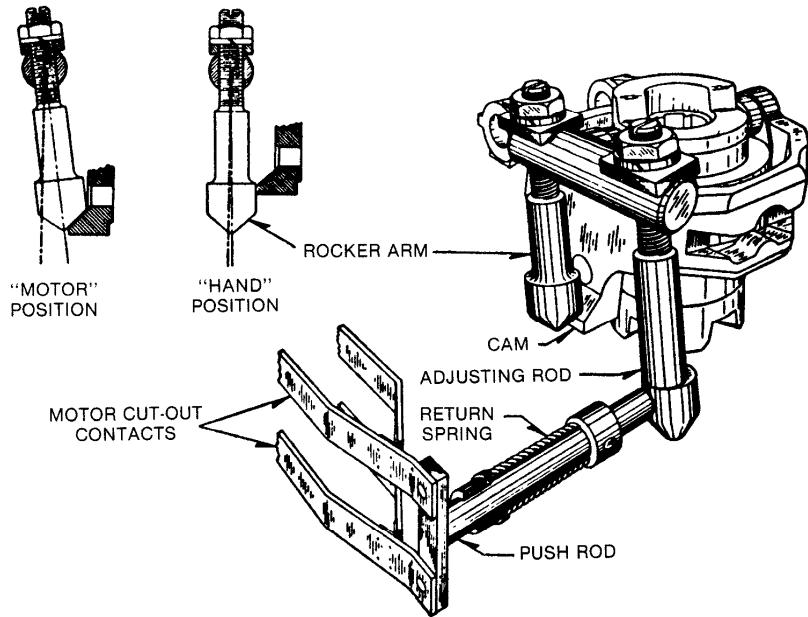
M-23A and M-23B Machines Motor Cutout Contact Assembly
